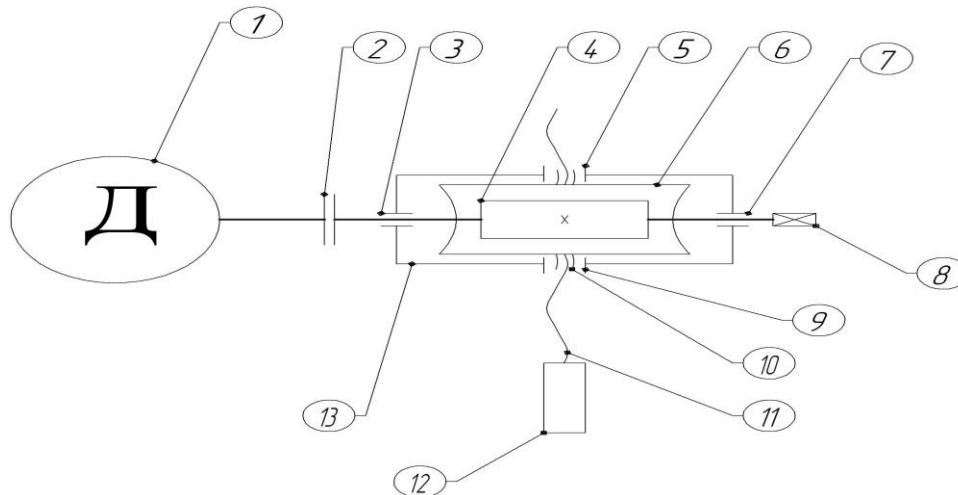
Kinematic diagram of spur gear drive without hand pinion:
